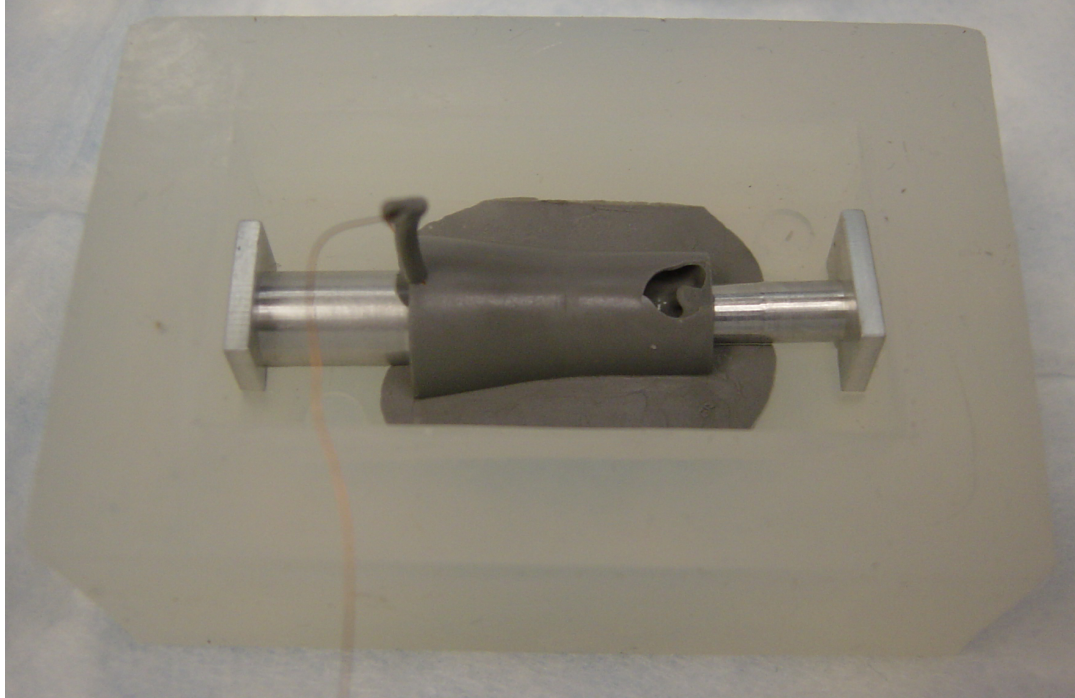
Molded silicone casing (gray) around a louver microvalve (fabricated by Yogesh Ekanath Kashte at Georgetown University). Note the two machined metal plugs pressed against either side of the louver valve. These plugs assured the absence of silicone on either side of the microvalve, so flow could pass through the casing if the valve was opened.
